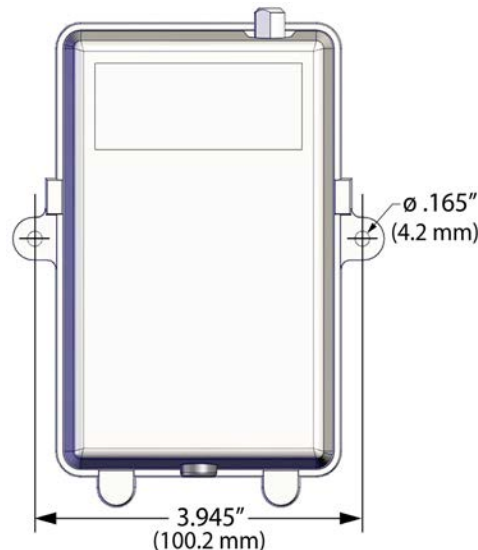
Receiver Mounting Tab Hole Dimensions
